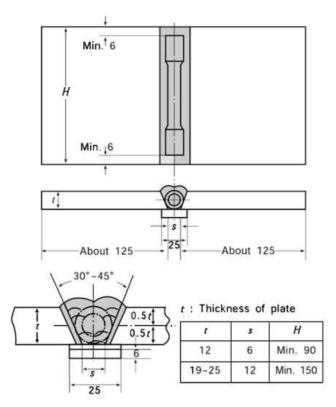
Deposited Metal Test Assembly for Stainless Steel (Unit: mm)
